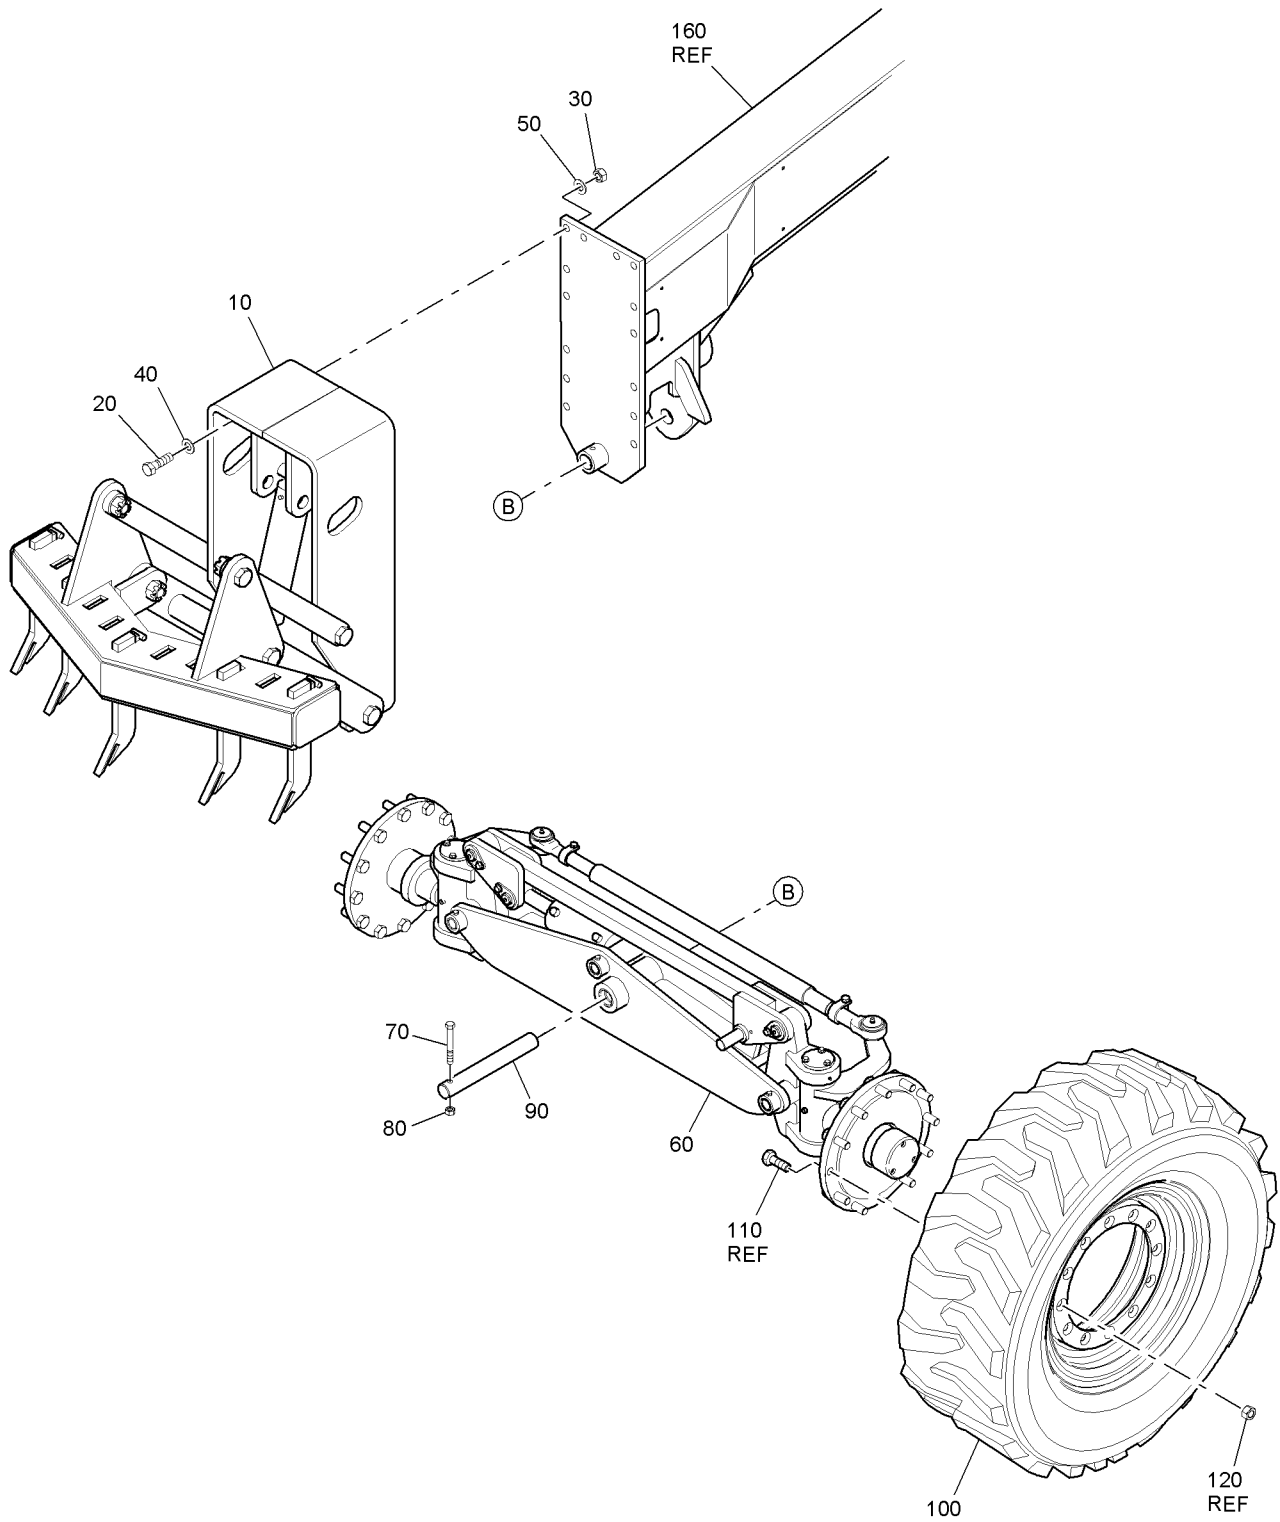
FRONT SCARIFIER AND FRONT AXLE ASSEMBLY
